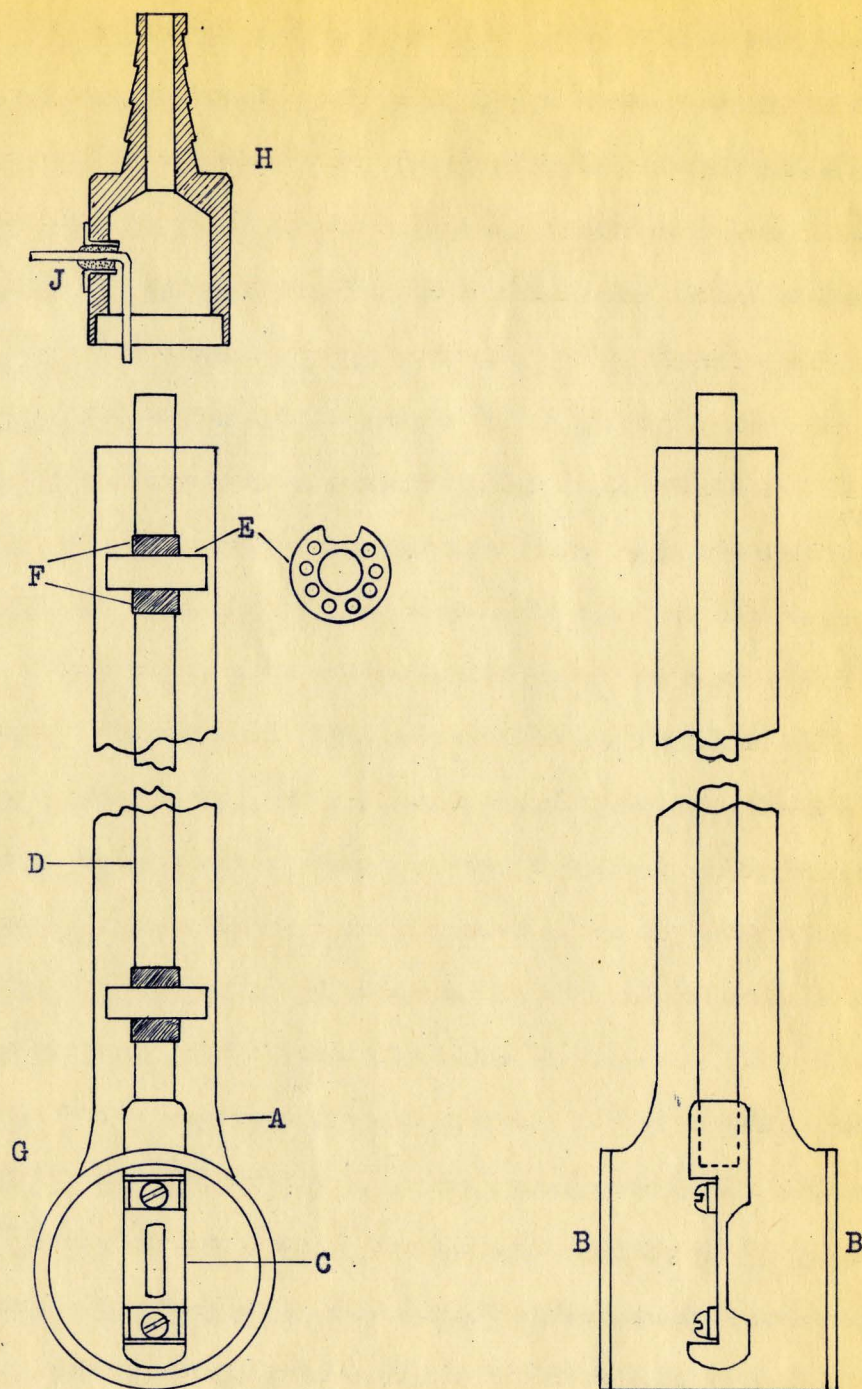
Cell and Crystal Holder for the Liquid Helium Work (A, Pyrex Cell; B, Sapphire Windows; C, Crystal Holder; D, Monel Tube; E, Lucite Bushing; F, Scotch Electrical Tape; G, Brass Machine Screw; H, Brass Fitting; J, Kovar Terminal)
